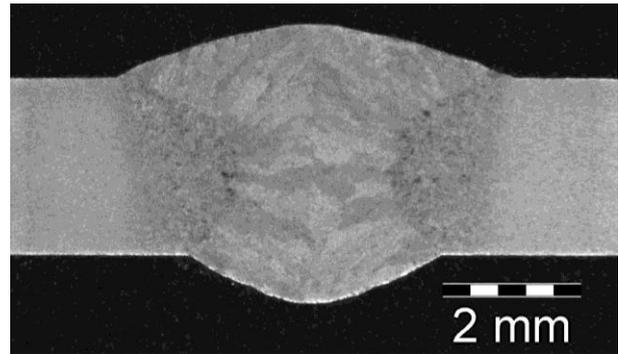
Macro specimen of a transverse butt weld (S700-T25-Z3-2)
